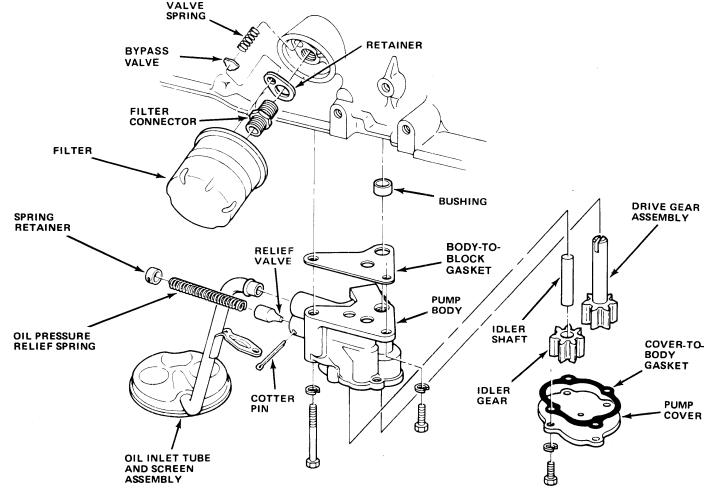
A-31 Oil Filter and Oil Pump Assembly
